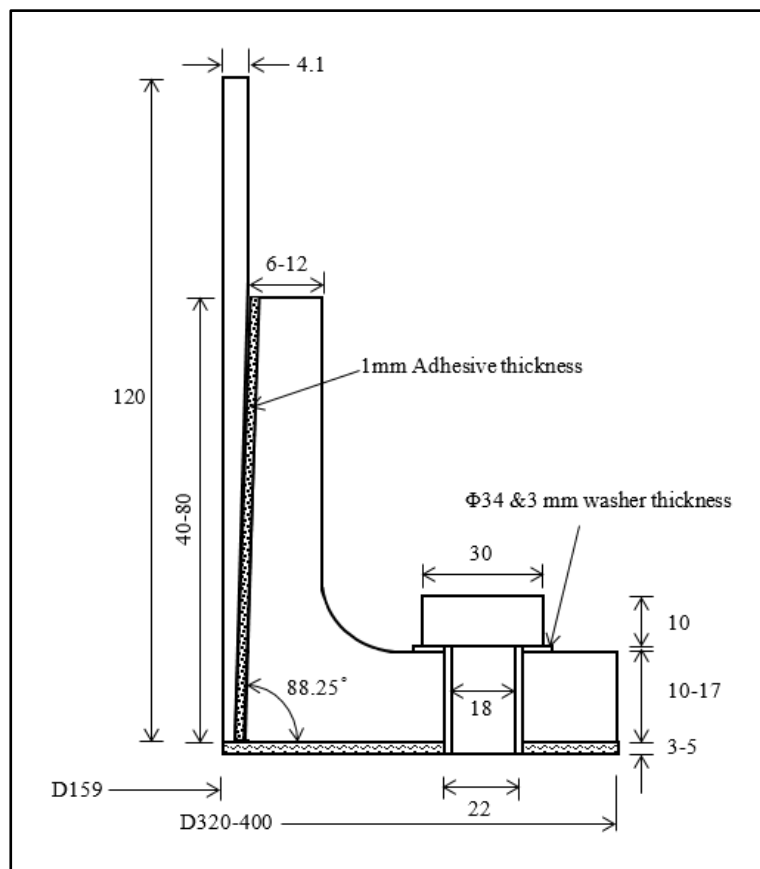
Dimensions of the bolted flange joint (mm)
